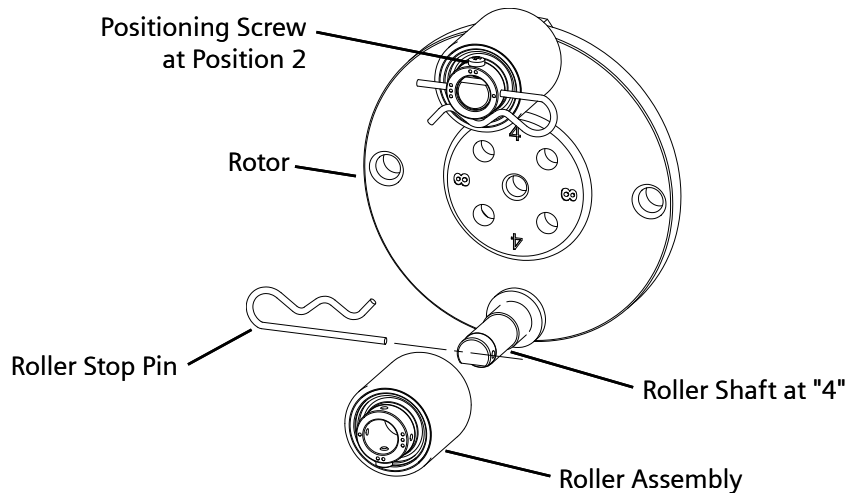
Roller Assembly, Roller Shaft and Rotor
